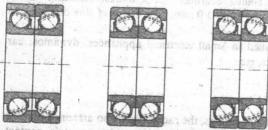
O-arrangement of two angular contact ball bearings of universal design
